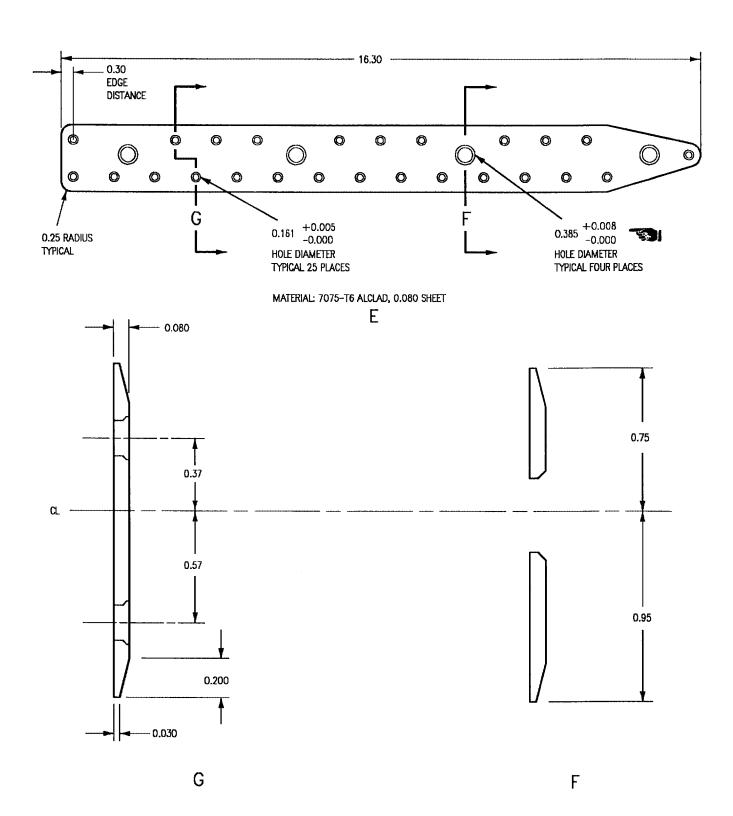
Door 3 Fastener Hole Repair (Sheet 3)
